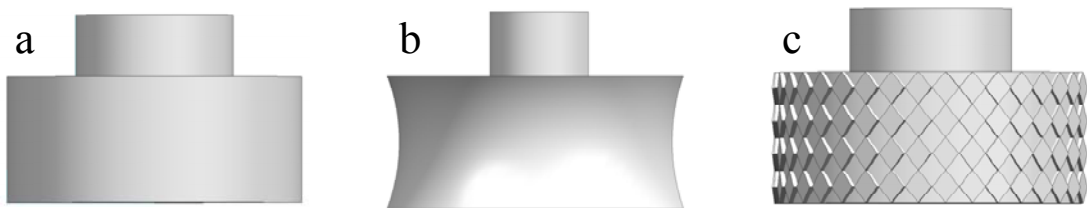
Schematic sketch of flywheels and rotating knobs
